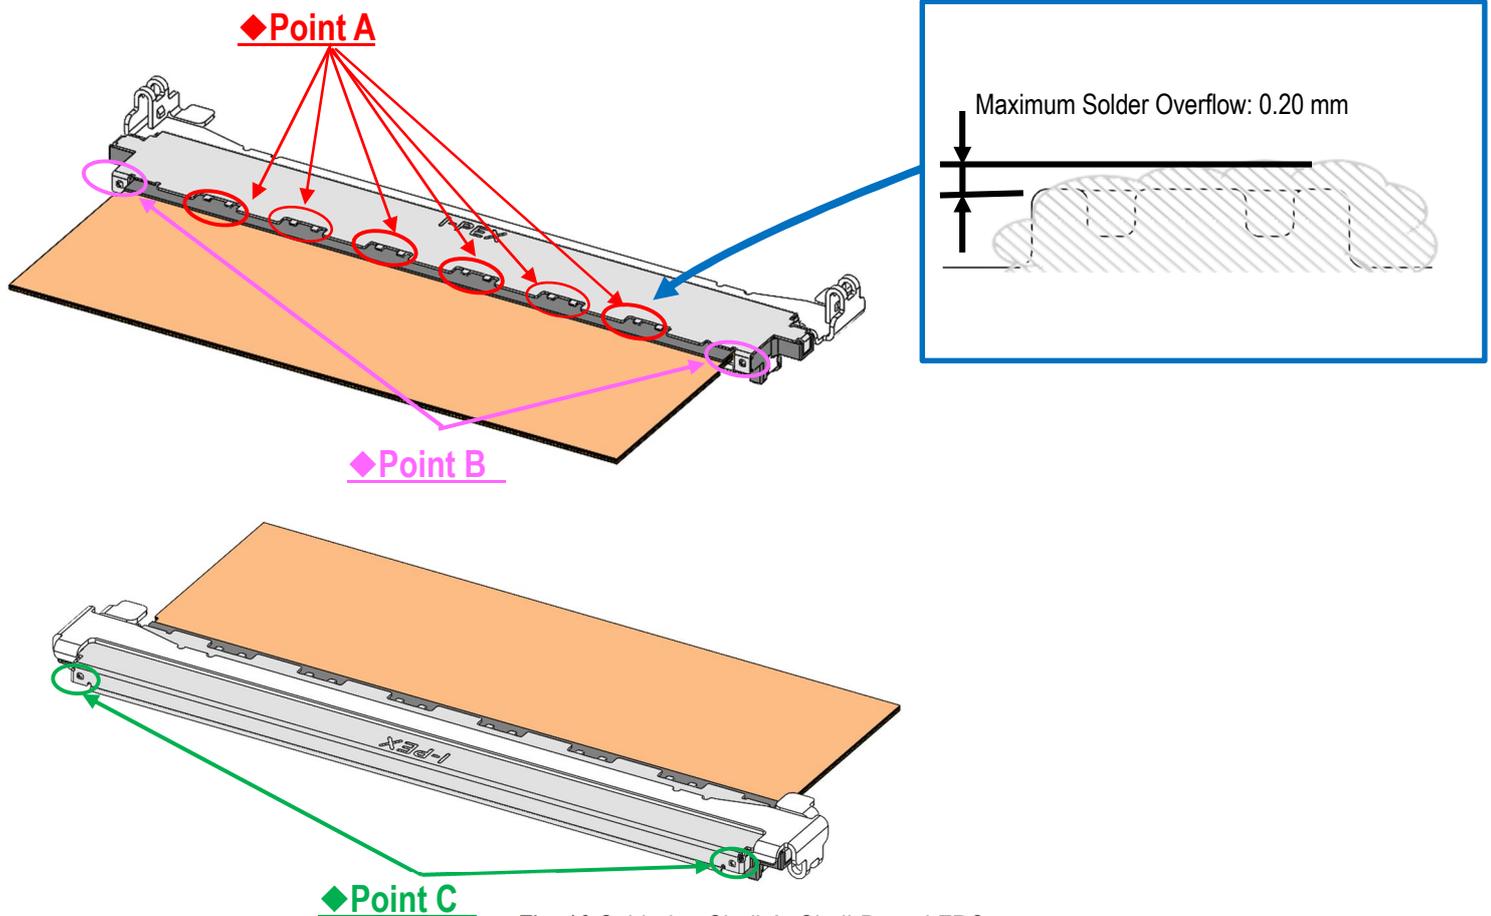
Soldering Shell-A, Shell-B, and FPC
